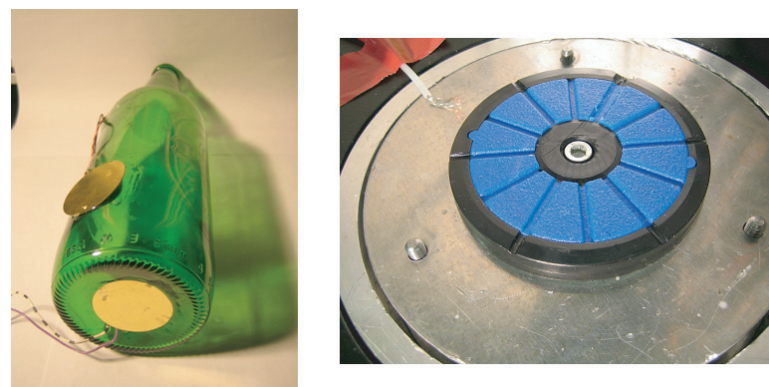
Fixation of the sensor to bottle bottom (left) and rotating drive (right) as possible location for piezo sensor integration into existing bottle inspectors (type carousel machine)
